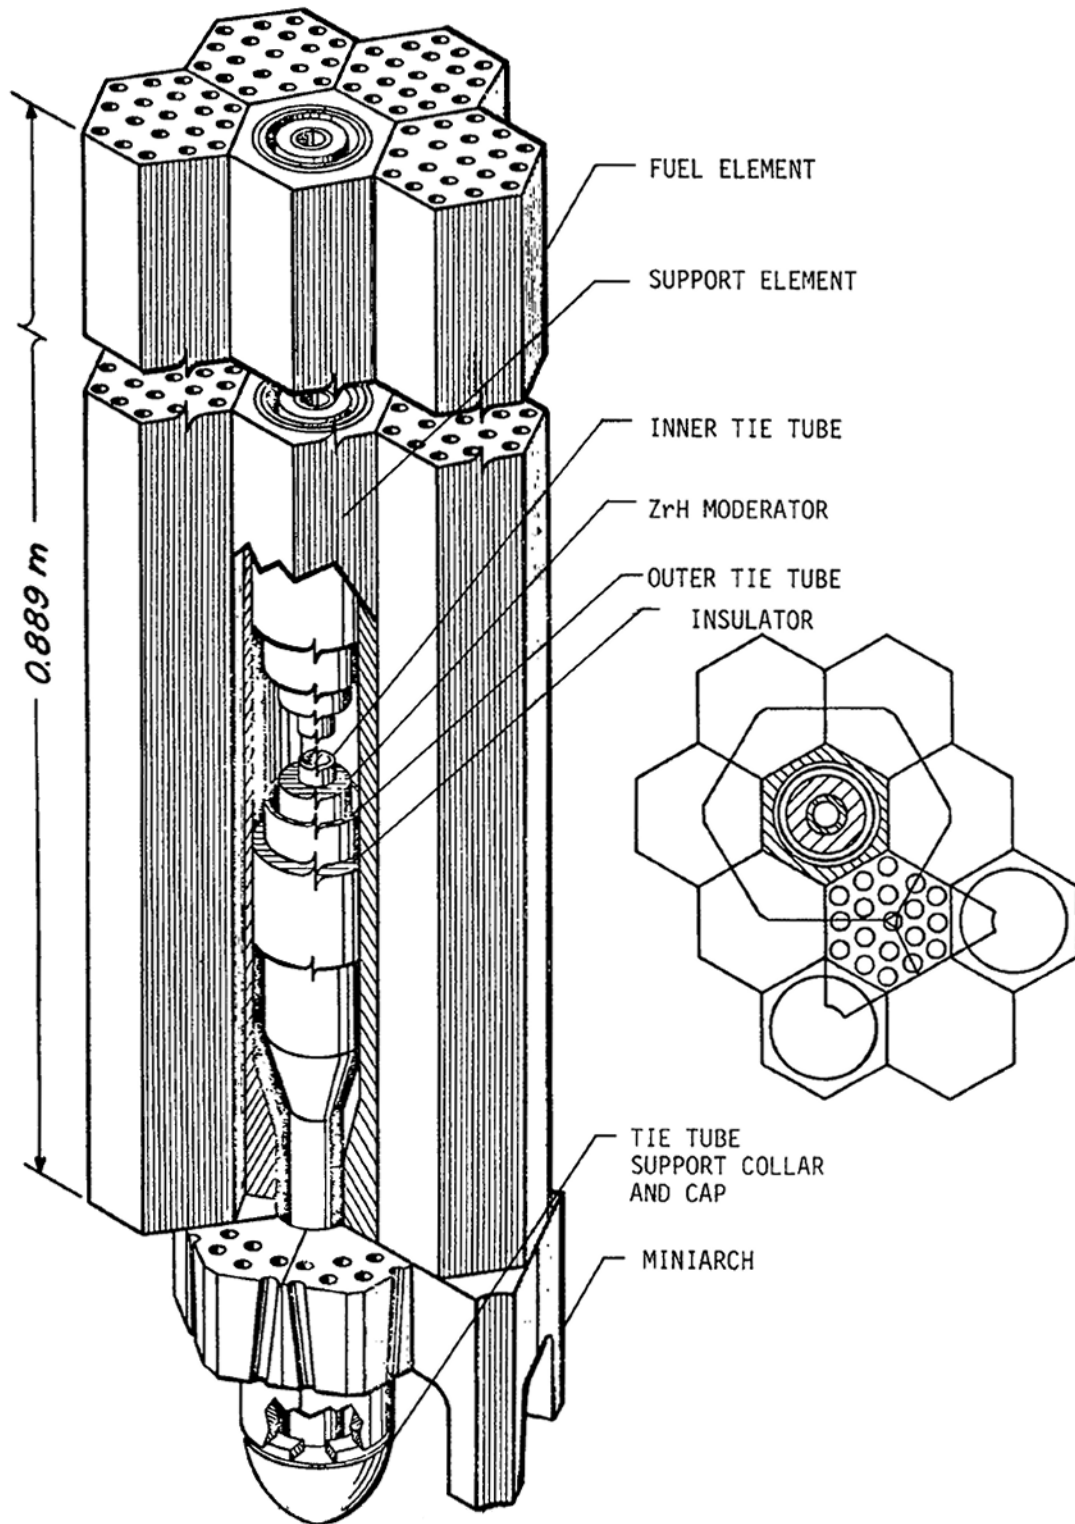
Cut-away view of a NERVA-derived fuel element / tie-tube assembly [37].
